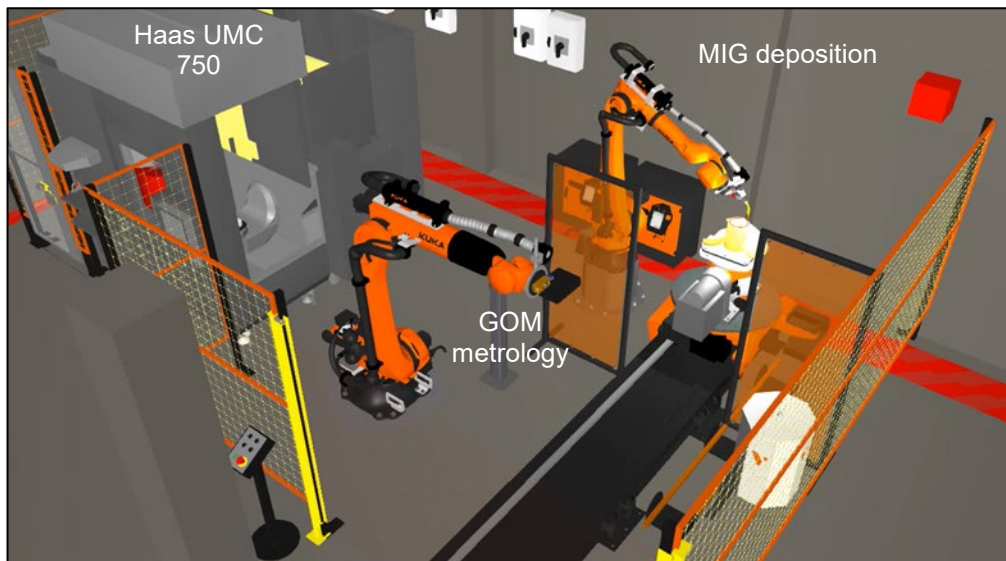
Large-scale hybrid manufacturing cell integrating wire-arc deposition, fringe projection metrology and five-axis machining.
